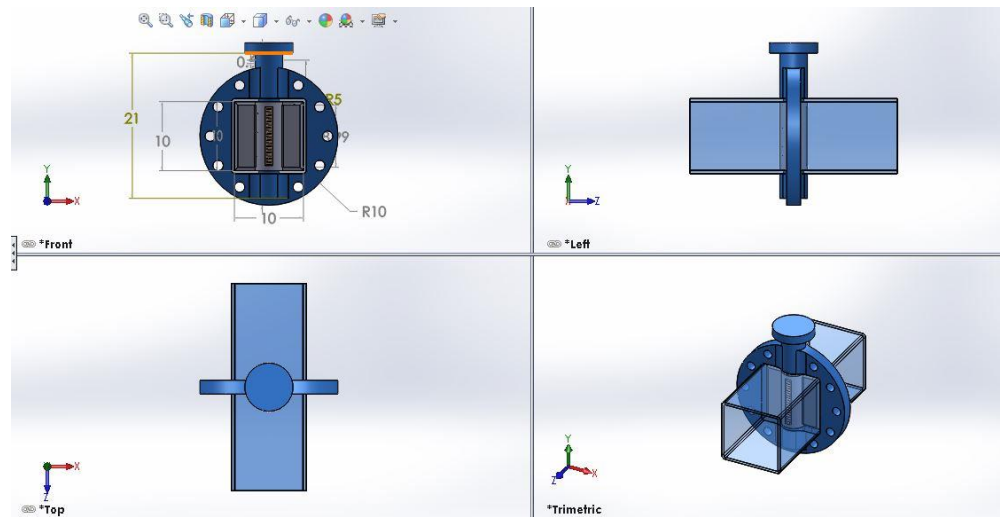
front view, side view, orthogonal and top view of the optimized FCD design.
